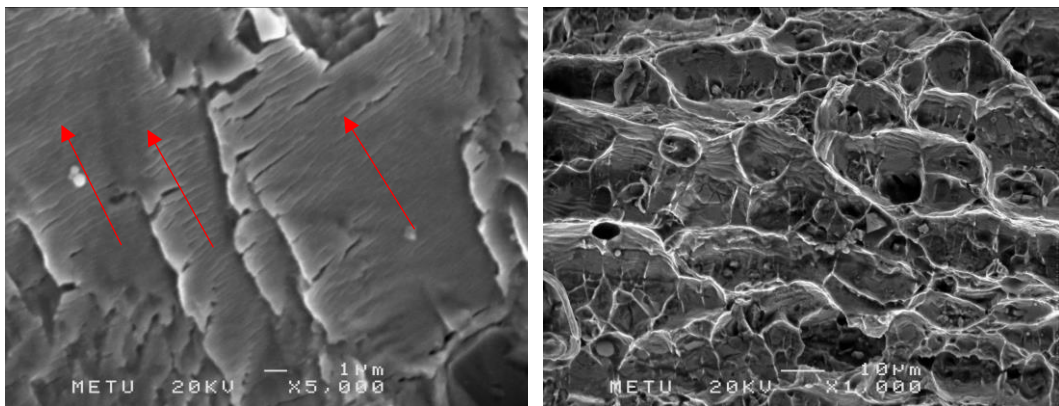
Fatigue crack growth (left) and fast fracture (right) region of 300H
